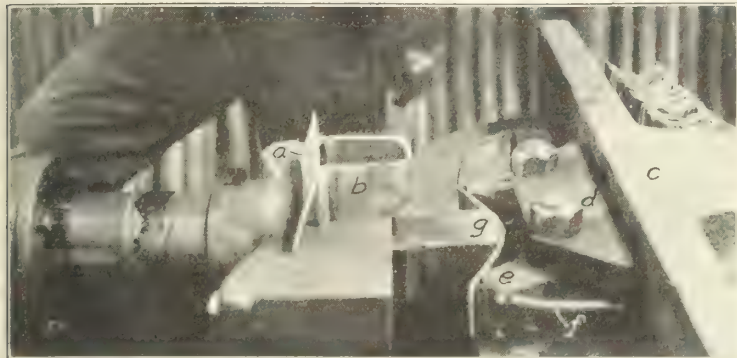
Forming Straddle Member of Superheater Tube Clips.
